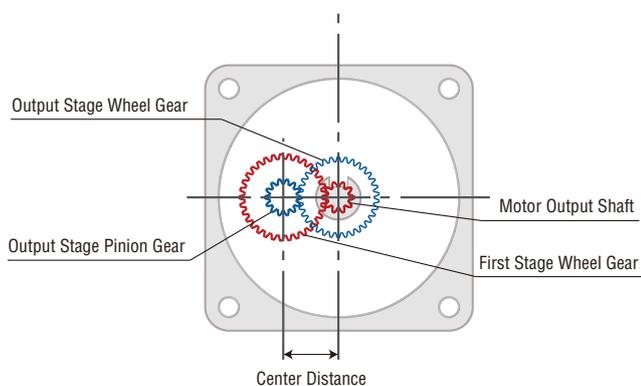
Concentric Structure by Design of Conventional Parallel Shaft Gearbox (View from front side)
